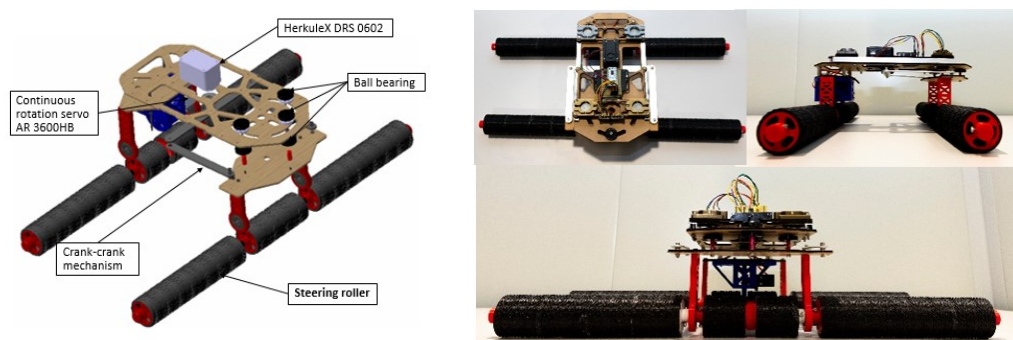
Roller add-on: a) 3D CAD design; b) MHYRO implementation.
